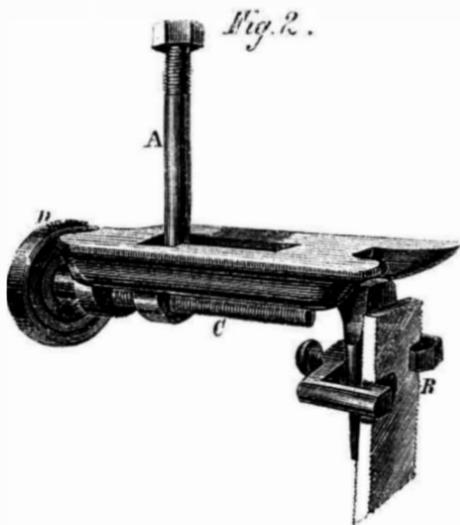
represents the jointer, shown in Fig. 1 attached to the under side of the guide by the bolt I, Fig. 1, and A, Fig. 2. A piece of mill file, B, is clamped on a slide that may be moved forward and backward by a screw, C, turned by the knob or hand wheel, D. This is permanently attached to the guide ready for instant use when jointing is required, and out of the way when the saw is in use. It may also be made to be used independent of the guide if required.
